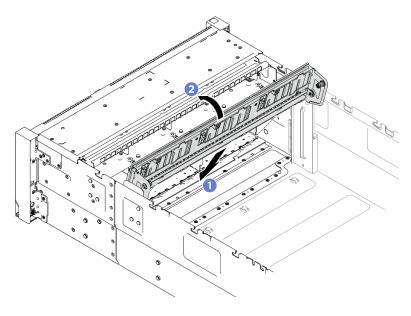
Installing drive backplane carrier assembly (E3.S bay chassis)
